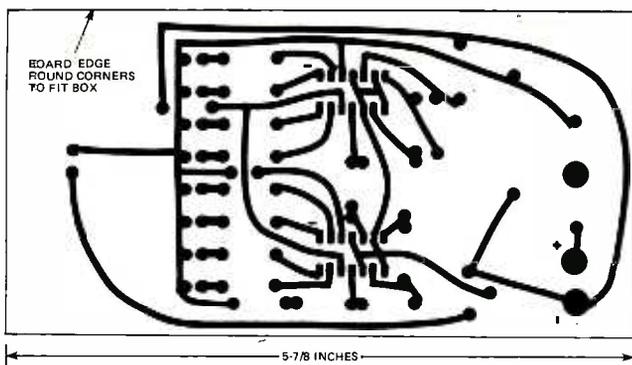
TAKE THE TROUBLE TO ETCH the foil pattern illustrated here to avoid a non-pro layout. Be sure to pre-drill all component lead holes before starting assembly.
